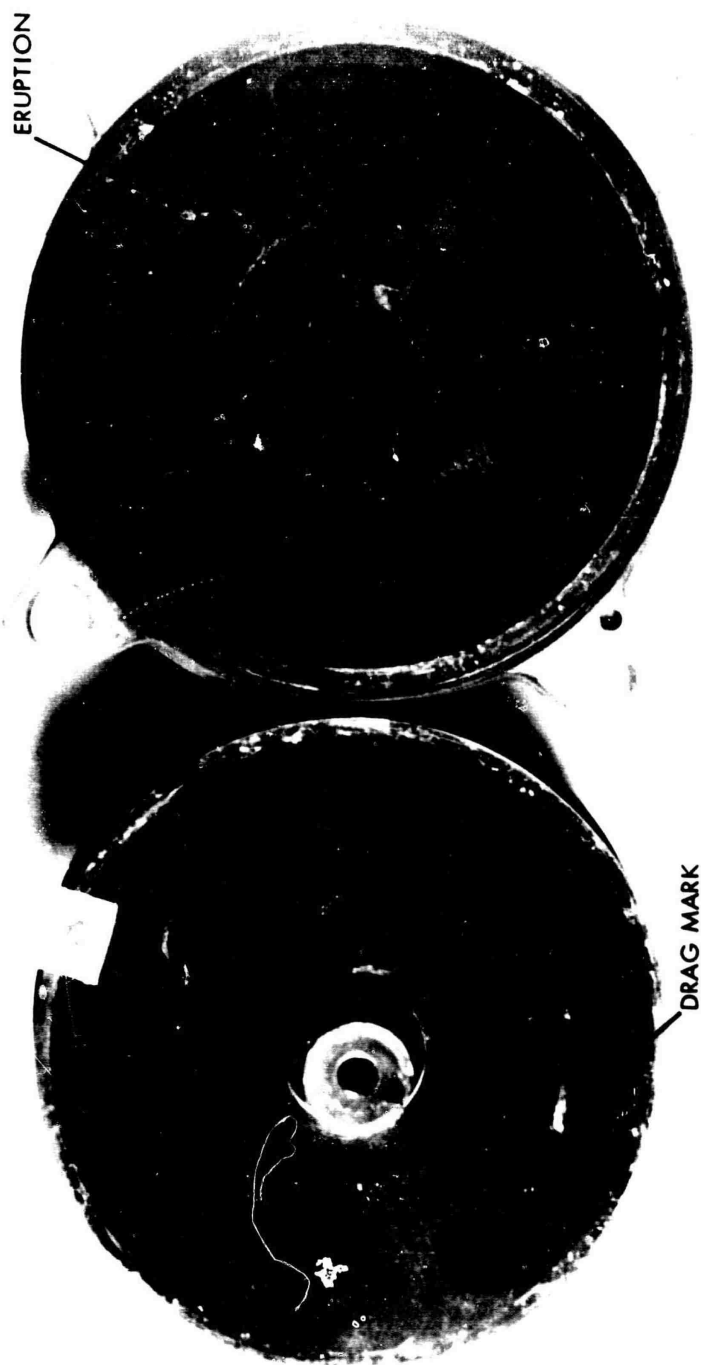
VIEW OF ROTOR AND MDF BLOCK SHOWING BLOCK ERUPTION AND ROTOR DRAG MARK
